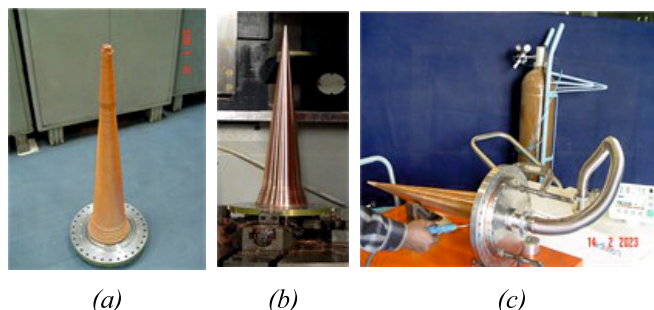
Electroformed copper- (a) before machining, (b) after machining, and (c) separation of cone.
